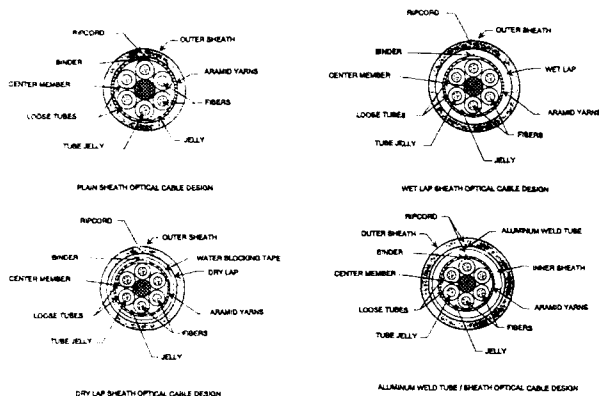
DIFFERENT LOOSE TUBE OPTICAL CABLE DESIGN
